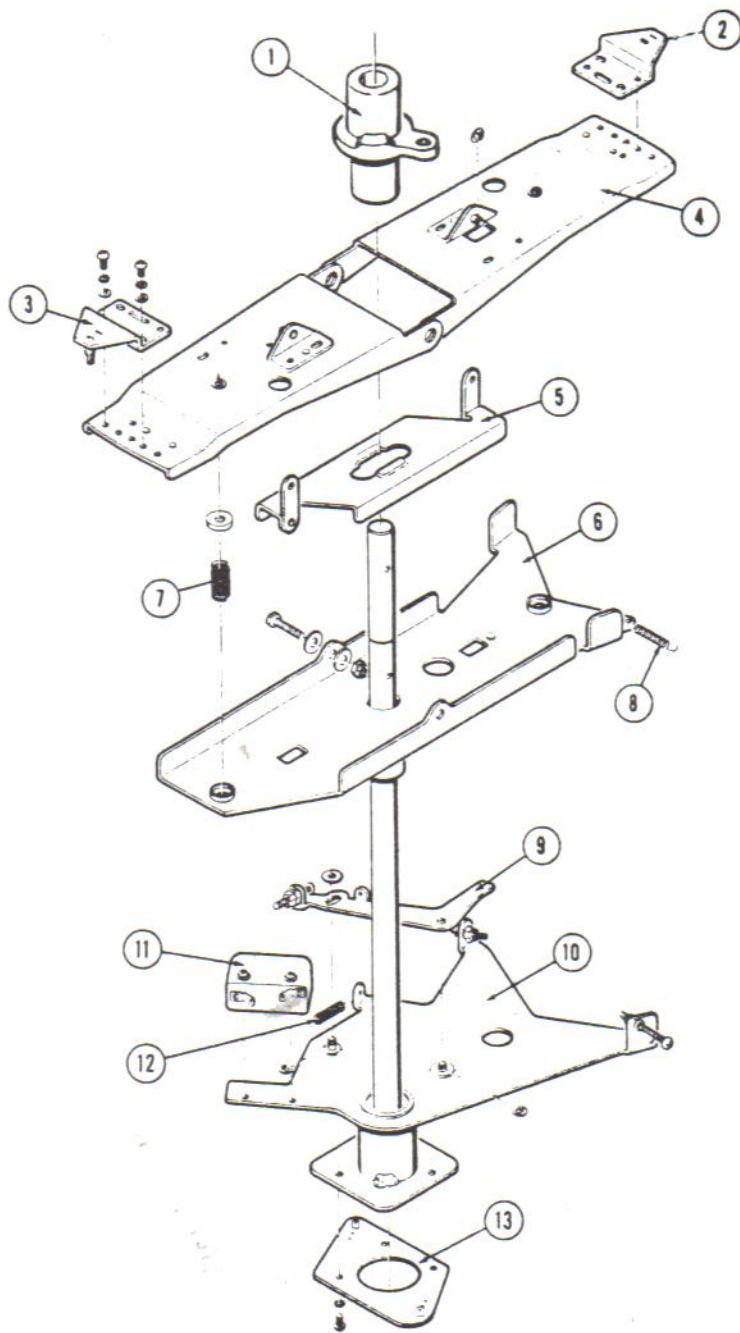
SELECTOR CRANK AND SHAFT ASSEMBLY
